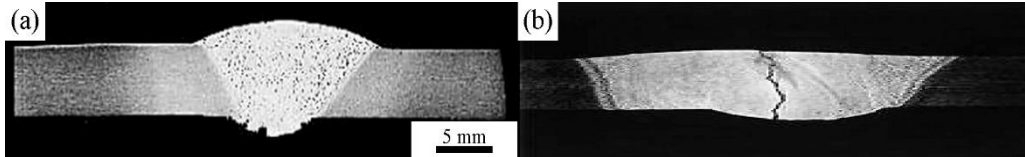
Tungsten inert gas (TIG) butt welding of 6mm plate showing trapped porosity in the weld region, and hot cracking in AA6082 with 4043 filler metal [16].
